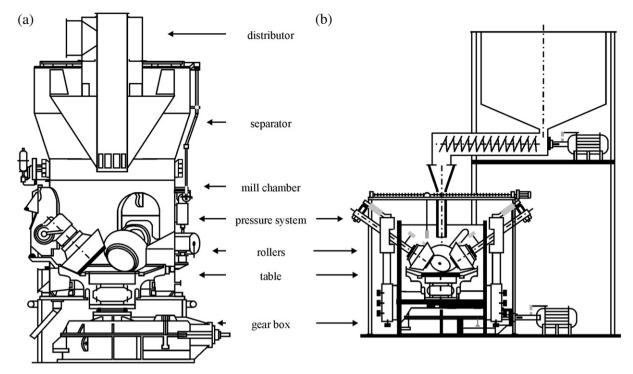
Pictorial schemes of (a) industrial ring-roller mill, (b) 1:4 scale model of the milling system (distributor, separator, mill chamber, pressure system, rollers, table, gear box).
